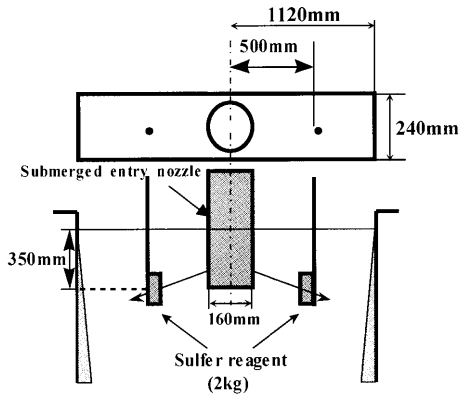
Schematic drawing of sulfur addition test to steel in mold.
